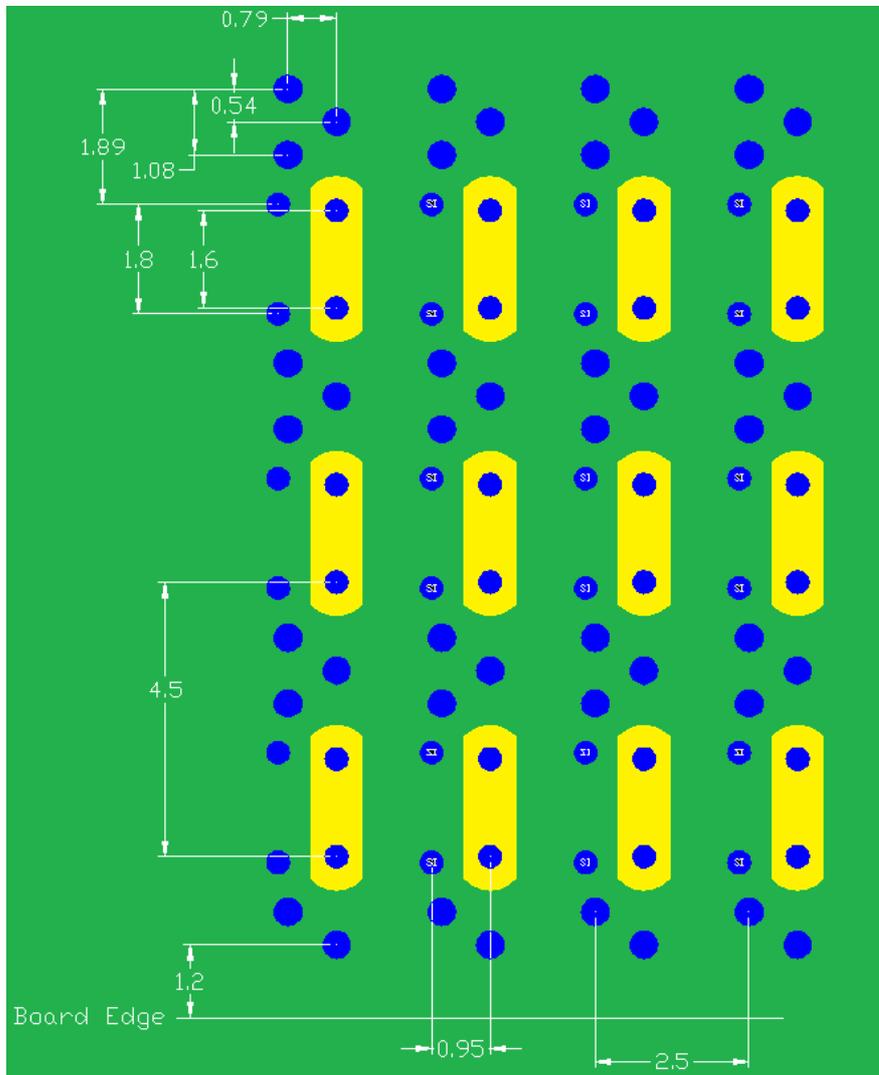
STRADA Whisper Daughtercard Footprint Dimensions
